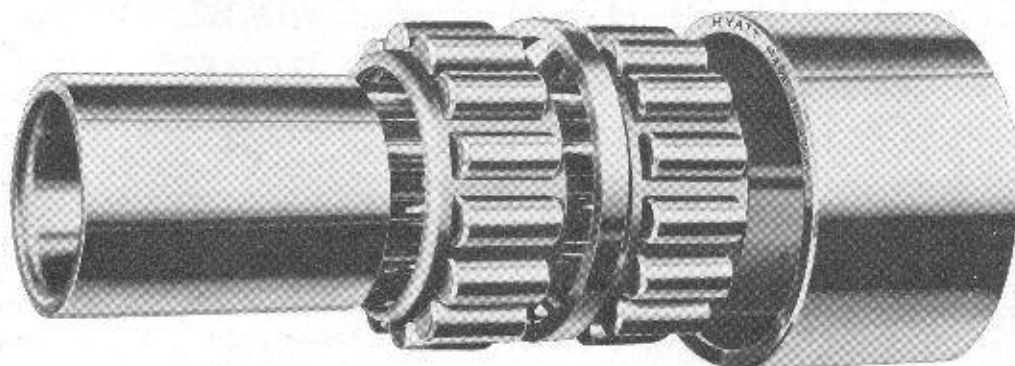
Hyatt railroad roller bearing completely disassembled.
